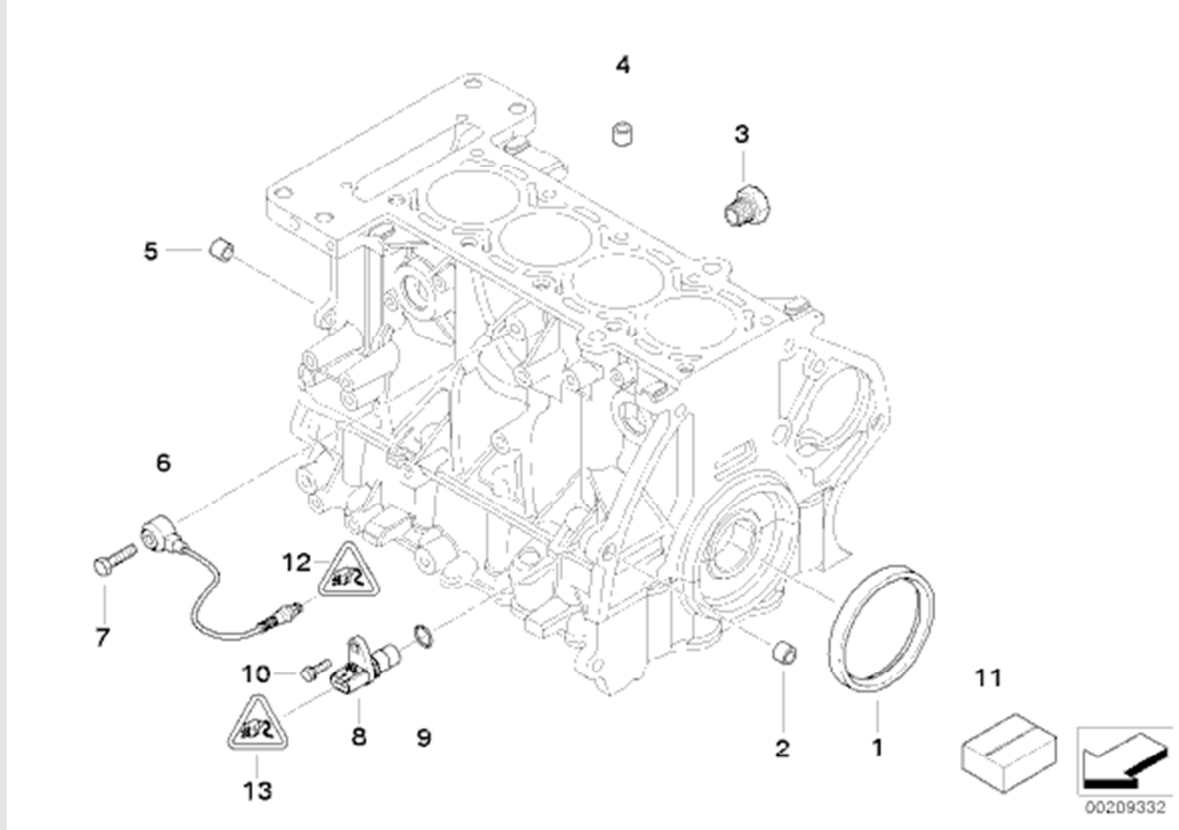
The crank sensor is part #8. You will need to replace the o-ring, part #9 and will be removing the small bolt, part #10, to remove and reinstall the sensor. Thank you, www.RealOEM.com, for the picture.
